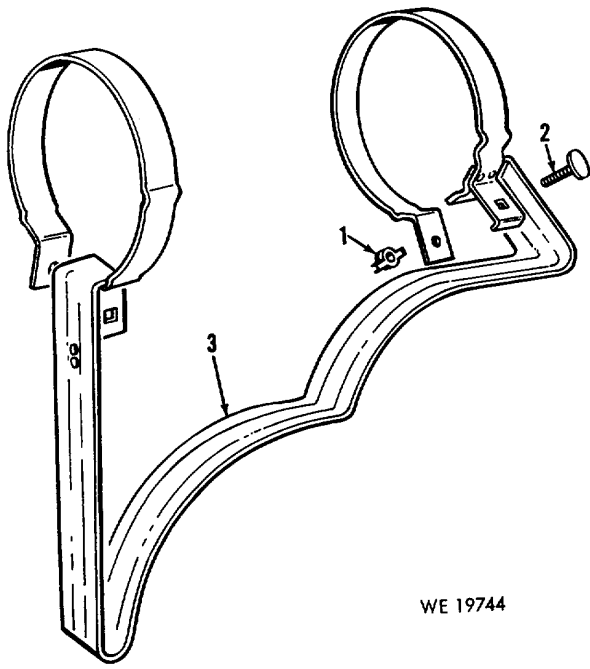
Stock (M20A1 and M20A1B1)-exploded view.
